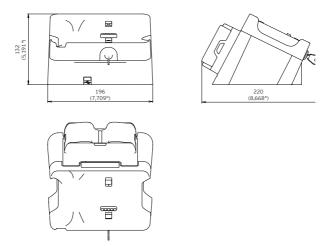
MobileXL charging- and docking station (dimensions in millimetres)
